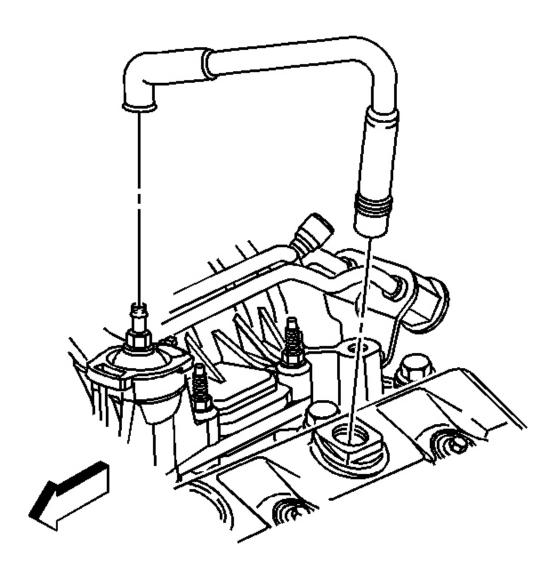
Locating PCV Valve Hose At Valve & Rocker Cover Courtesy of GENERAL MOTORS CORP.
